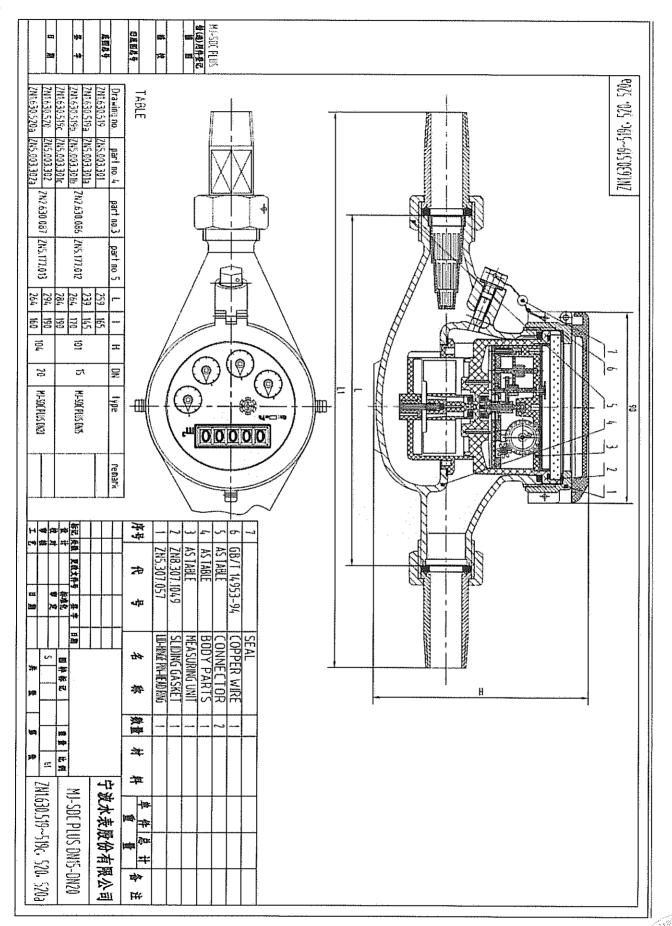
The water meter type MJ-SDC PLUS with AMR pointer - assembly drawings:
